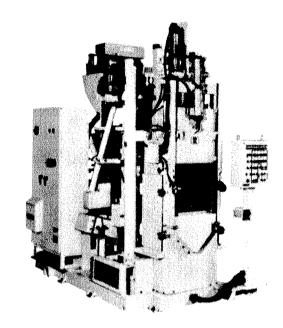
Overview of shot peening machine. Applicable workpieces: Transmission gears, Drive gears Intensity (Arc height): Max. 1 OmmA at coverage 300% (Full coverage x 3)
